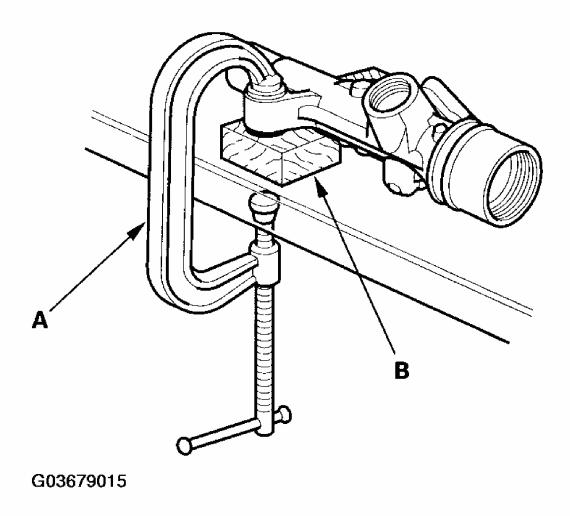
Holding Gearbox Housing Using C-Clamp And Wooden Block Courtesy of AMERICAN HONDA MOTOR CO., INC.
